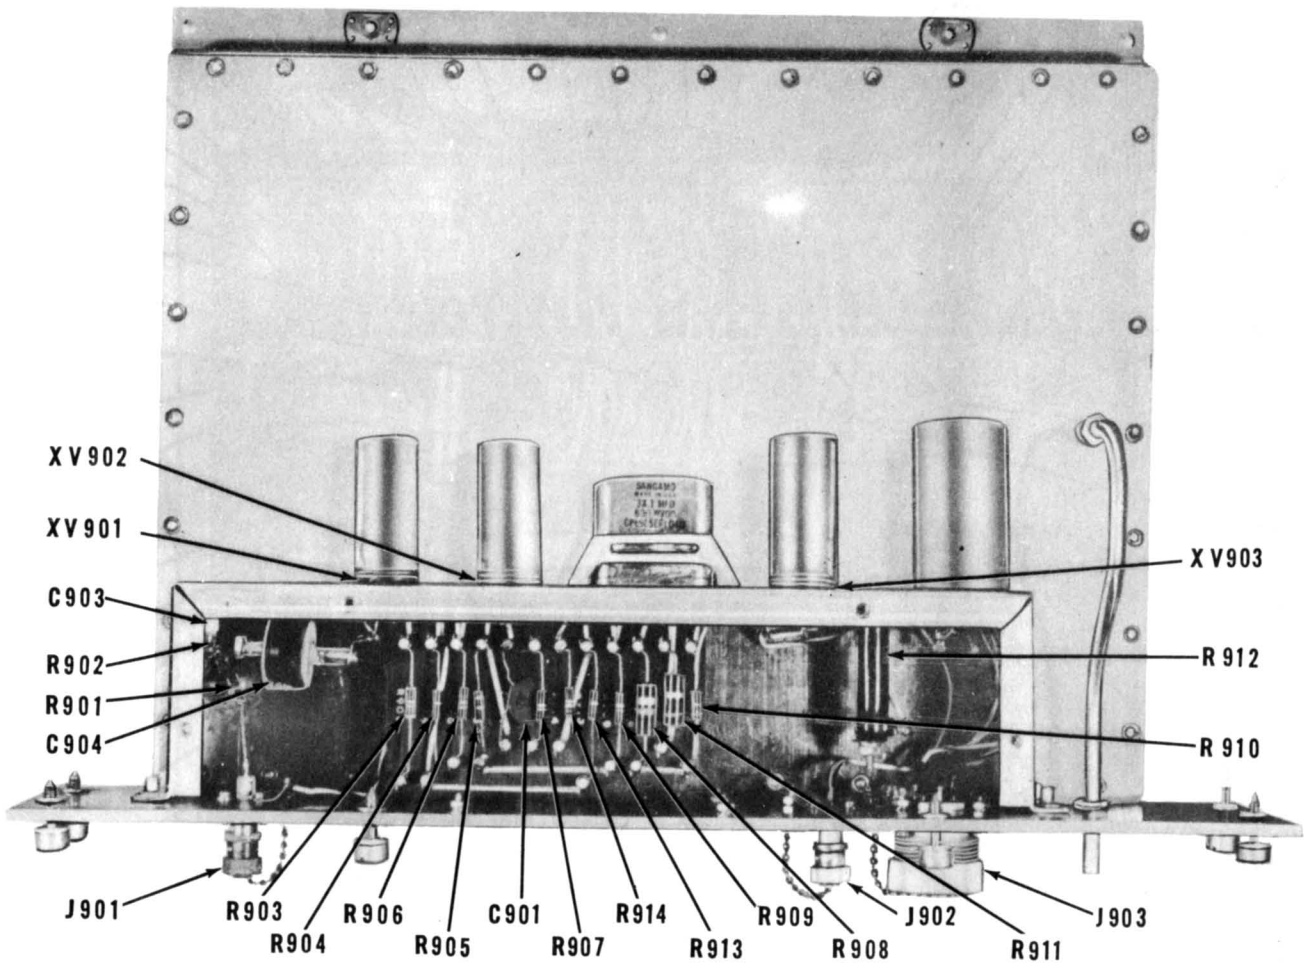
Radiac Indicator DT-40/UD, Component Location, Top View
